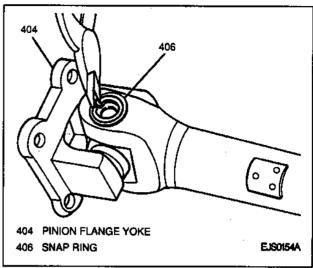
Removing Snap Ring From Pinion Flange Yoke
